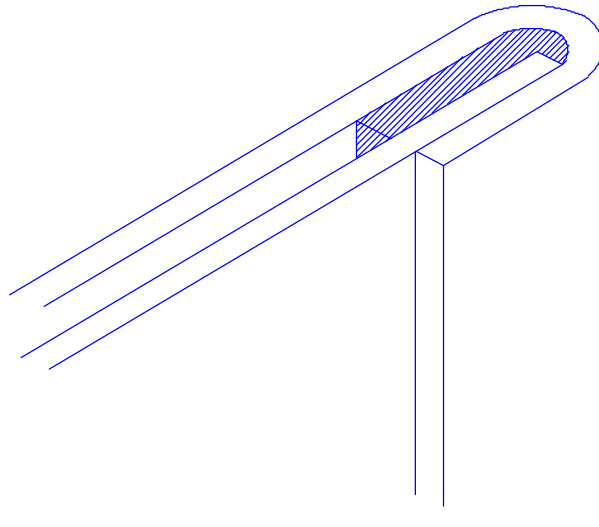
A hem flange can be used to fixture components while the adhesive develops handling strength. The adhesive has been confined by the flange, eliminating squeeze-out or run-out¹
